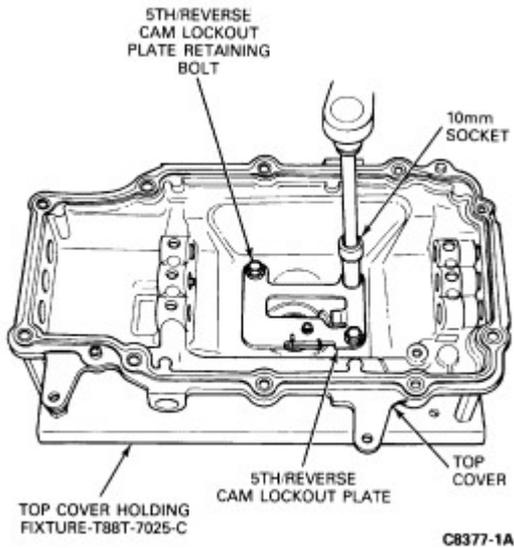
Removing Fifth/Reverse Cam Lockout Plate Retaining Bolts
